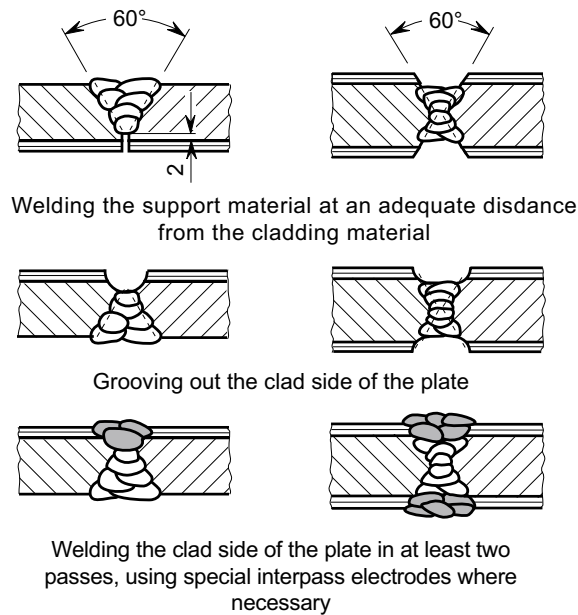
Weld shapes for welding of clad plates
